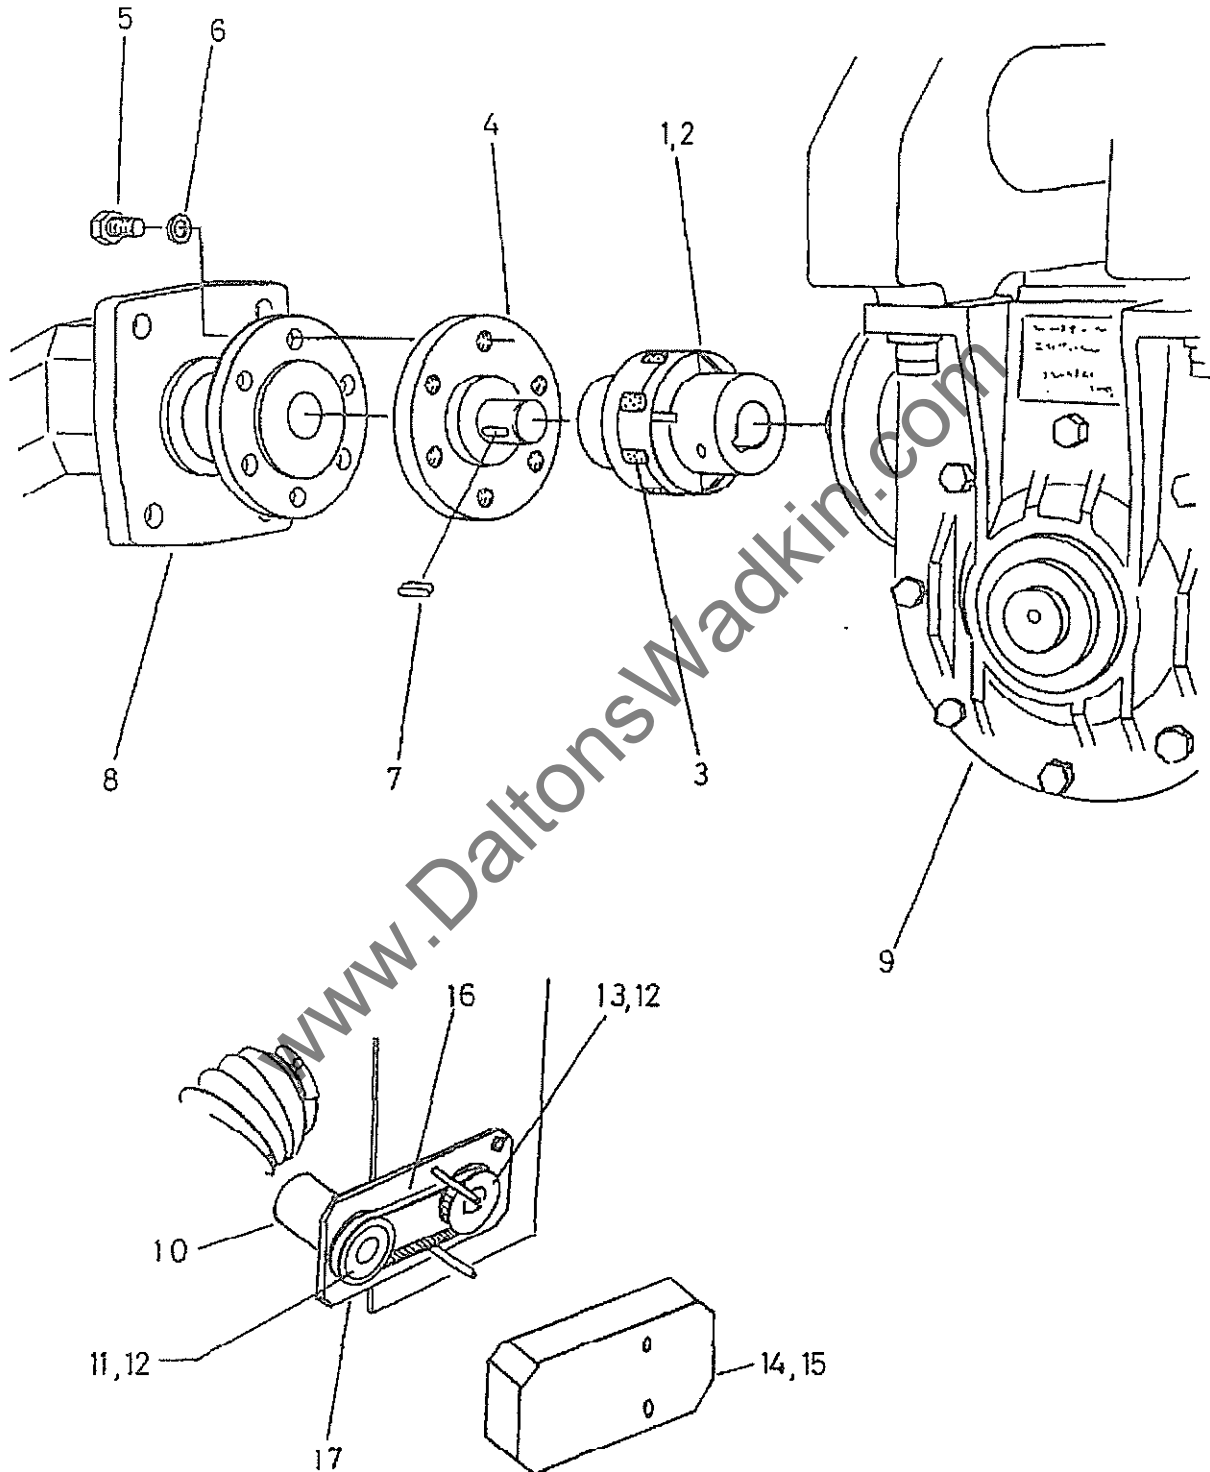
DIRECT HYDRAULIC DRIVE TO FEED ROLL GEARBOXES AND TACHOMETER DRIVE
